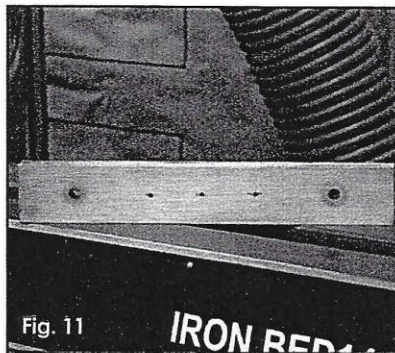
The bed insert helps lock the rest to the lathe bed.
